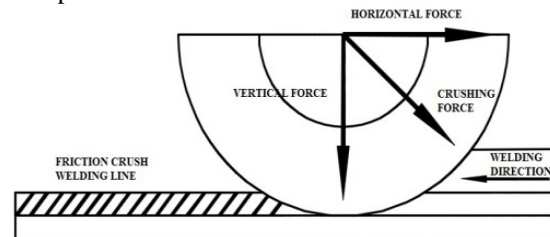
Mechanism of friction crush welding [1,2] between the work piece and the tool and b) crushing forces were developed by tool movement due to variation in
